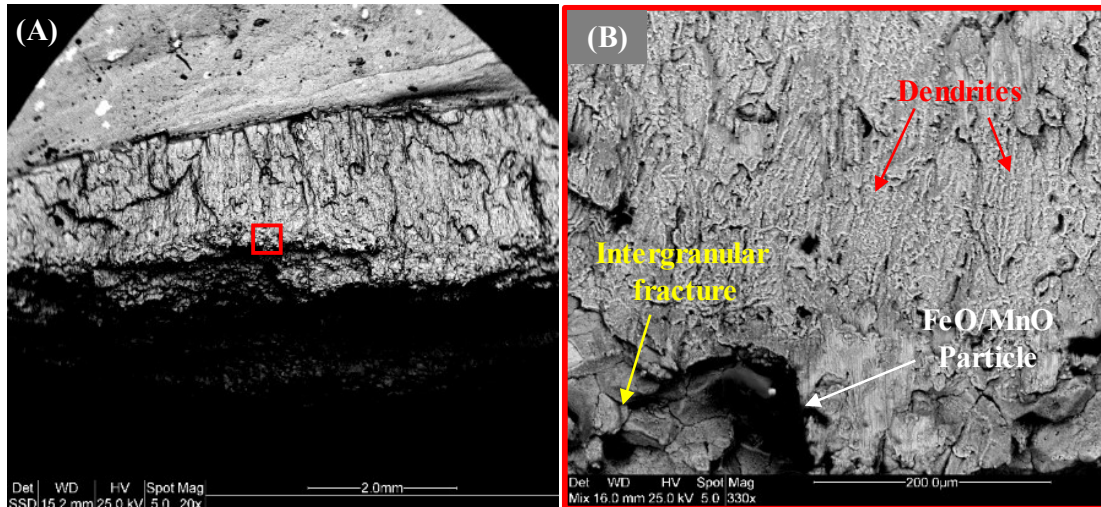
Images taken from the weld metal region of the fracture near the toe of a top-layer weld; A) low magnification backscatter electron image of top edge; B) blow-up image of the red highlighted region in A
